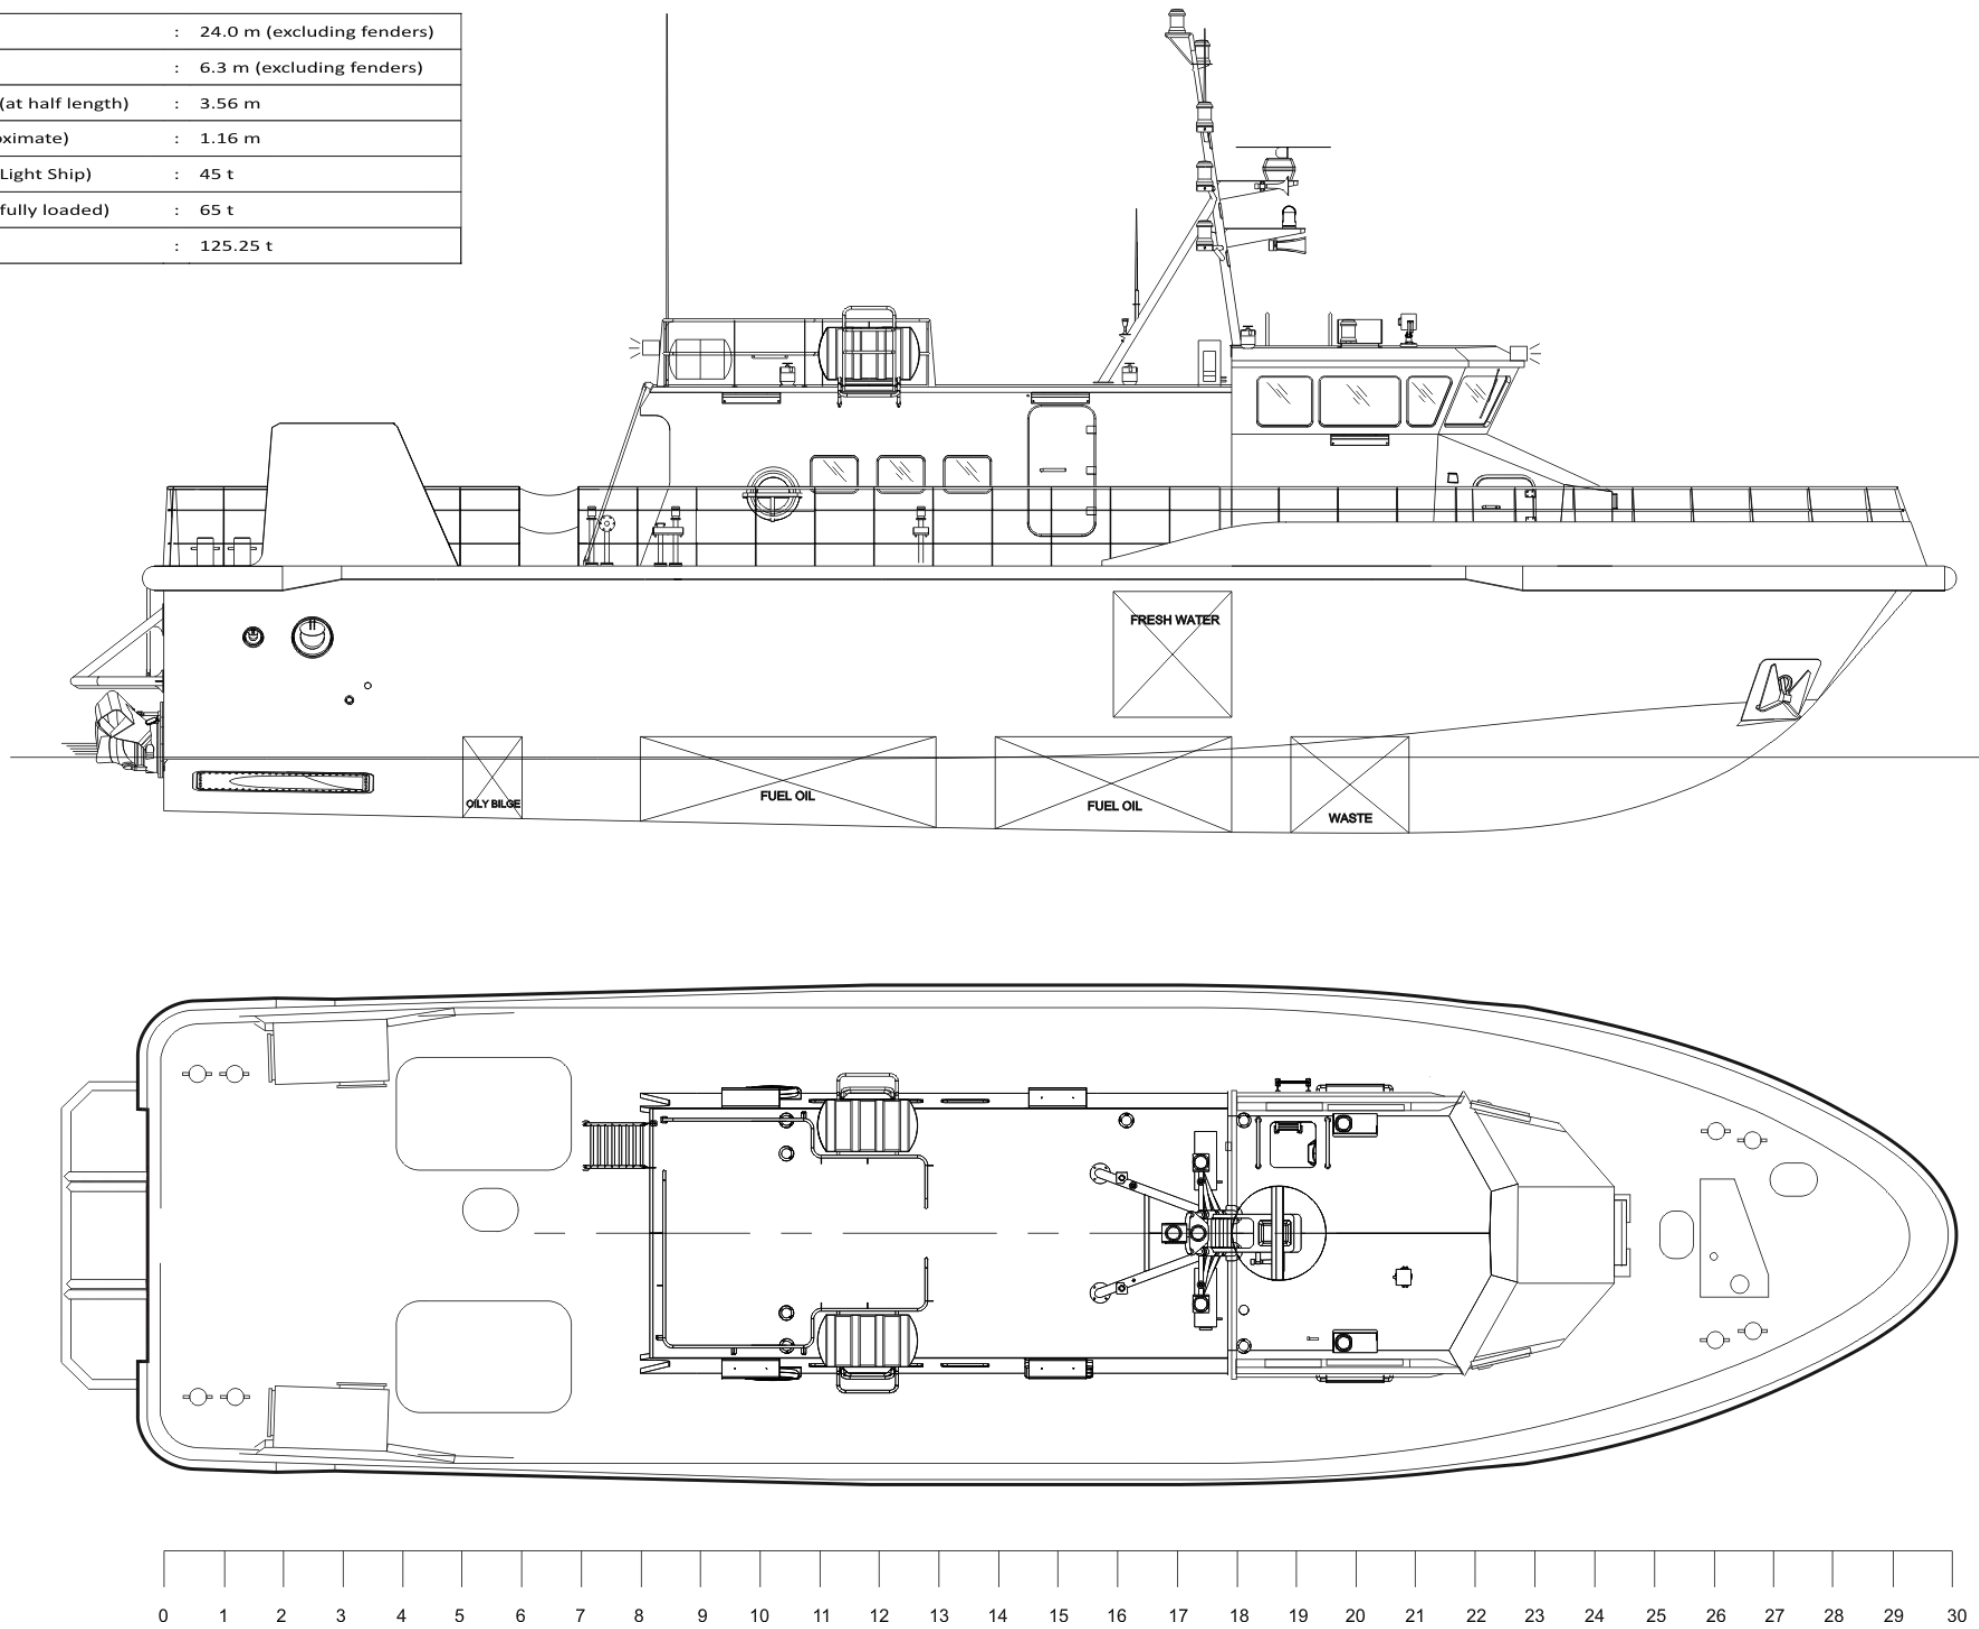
General Arrangement I.H. Pepple Fast Crew Boat Side View and Top Deck
